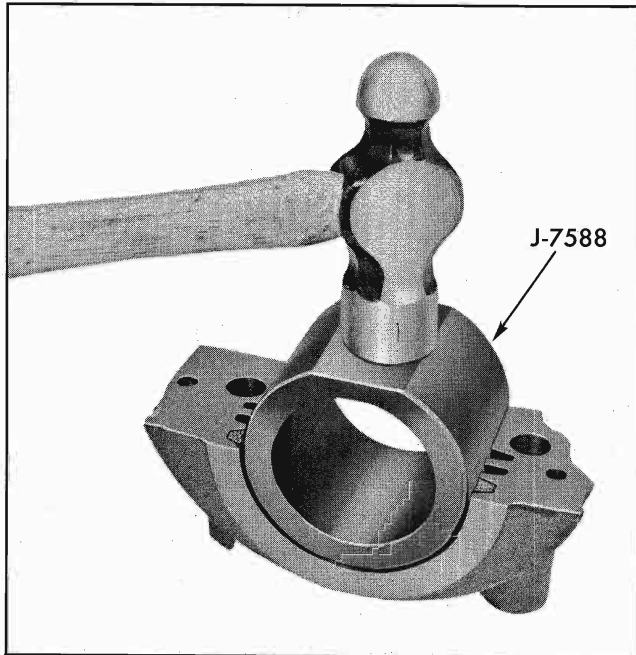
Compressing Upper Seal in Bearing Cap with J-7588
